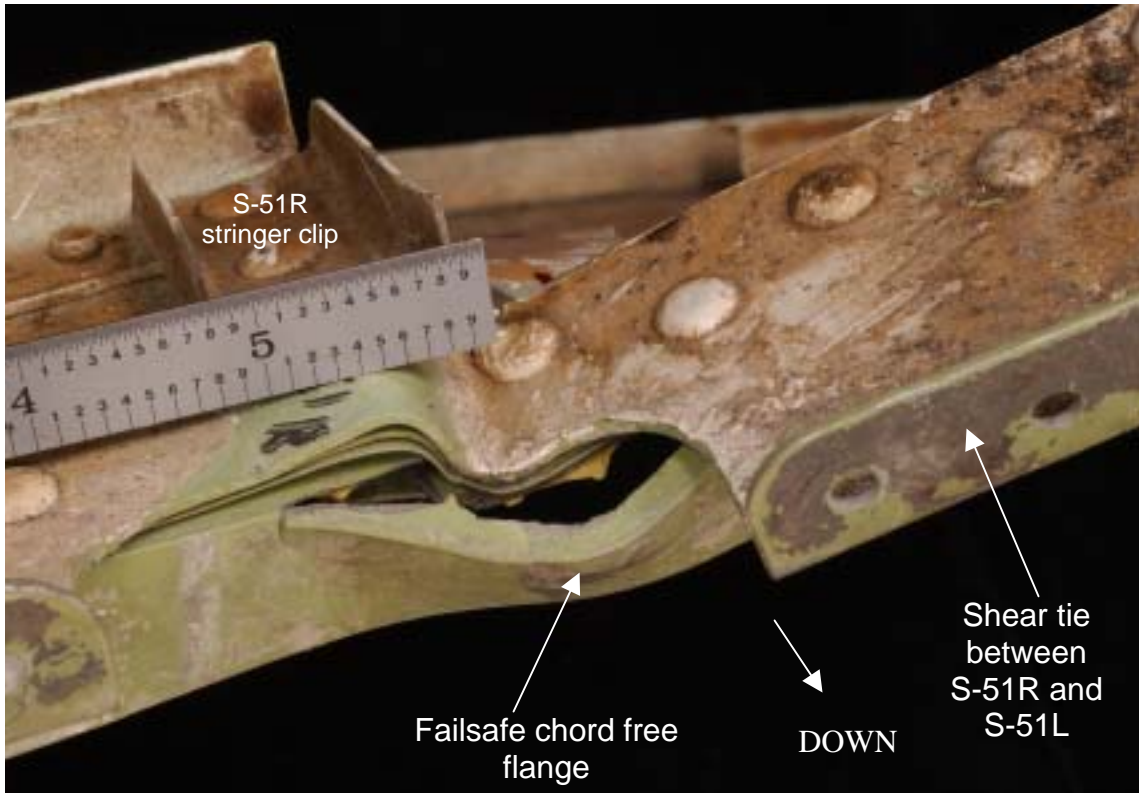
Fracture in failsafe chord free flange radius at S-51R of the STA 2040 frame segment.
